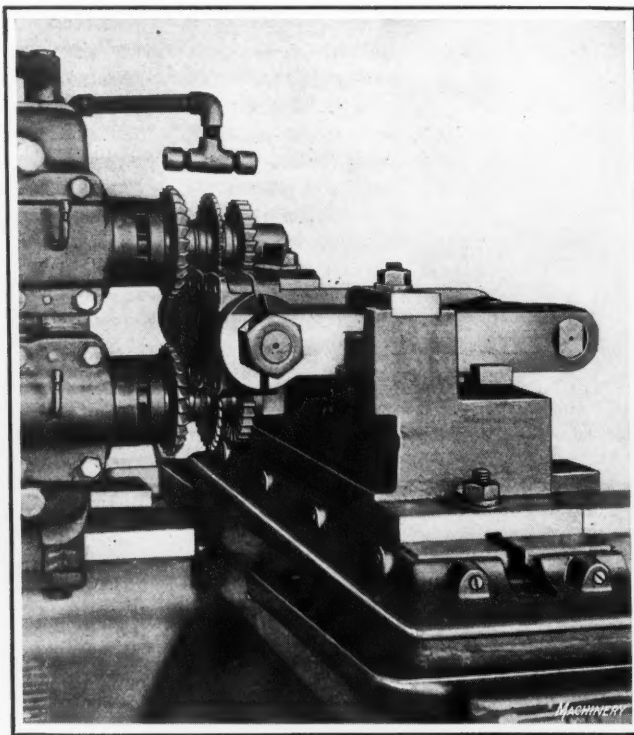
Close-up View of Automatic Milling Machine equipped with a Duplex Head, as shown in Fig. 1, used for milling Hinkley Connecting-rods
